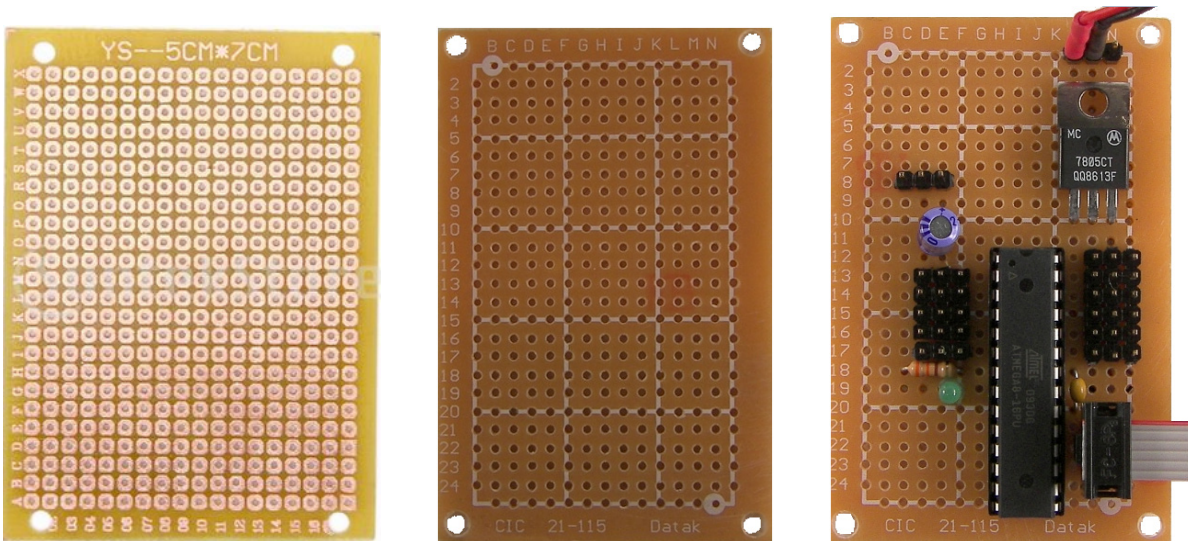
Example of a typical printed circuit board PCB; (a) Solder side, (b) Component side, (c) Component soldered on PCB
